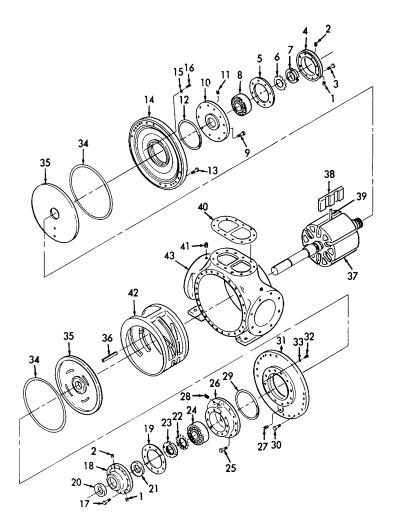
Transfer Pump, Disassembly/Reassembly.
